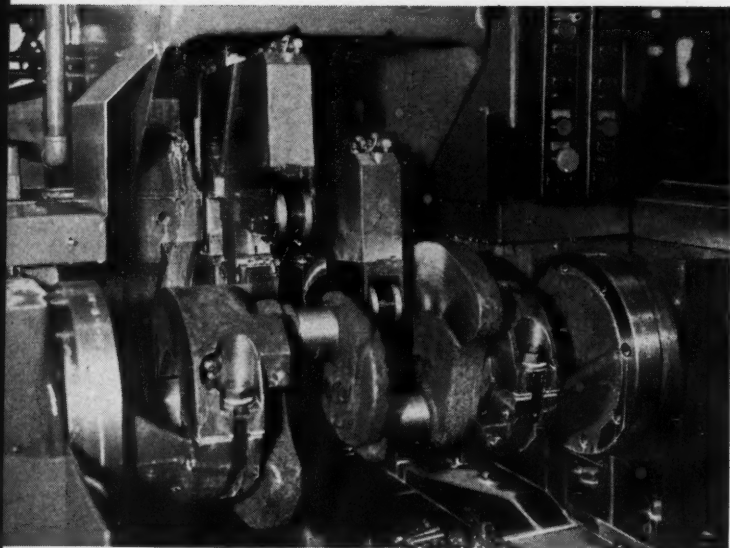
Turning the crank pins and facing the cheeks on a P & W airplane engine crankshaft. This machine, built by the Crankshaft Machine Co., Jackson, Michigan, was especially designed for this operation.
